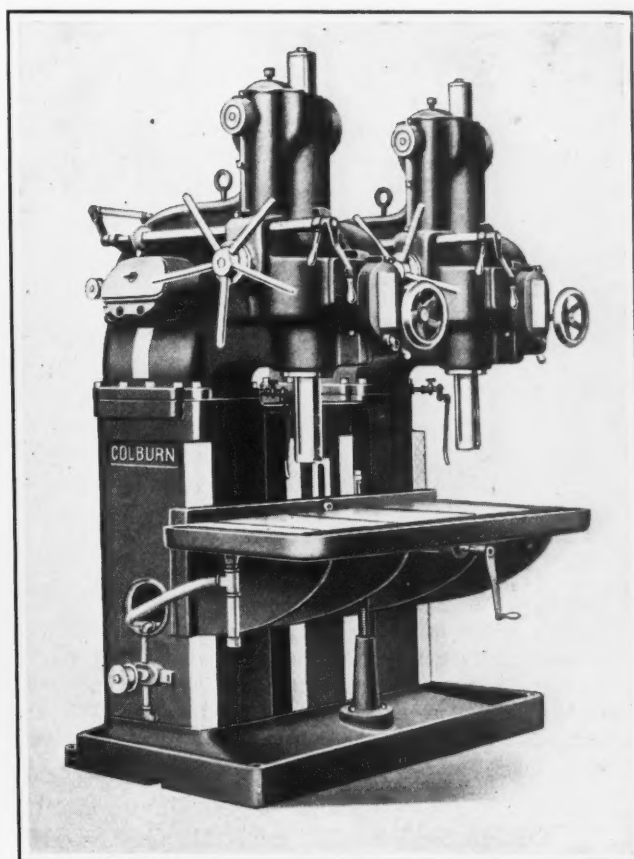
Colburn Two-spindle Drilling Machine equipped with a Plain Table
